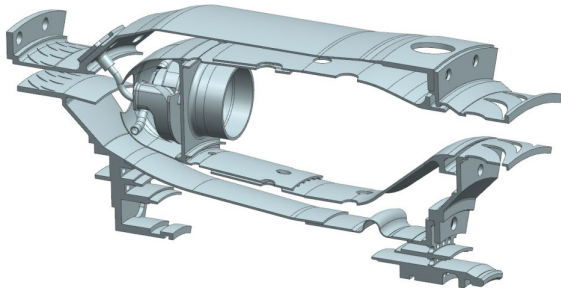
Three-dimensional models of combustion chamber parts in a single-burner sector of the combustion chamber
